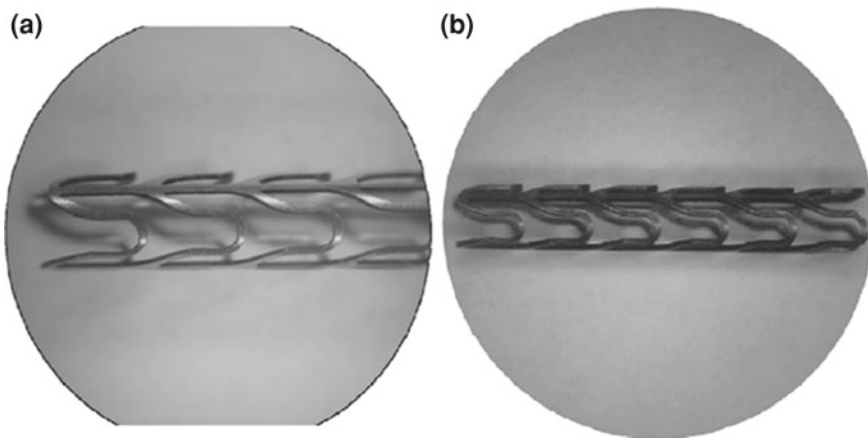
316L stainless steel cardiovascular stent: (a) cut with fiber laser and (b) cut with YAG laser [127]
